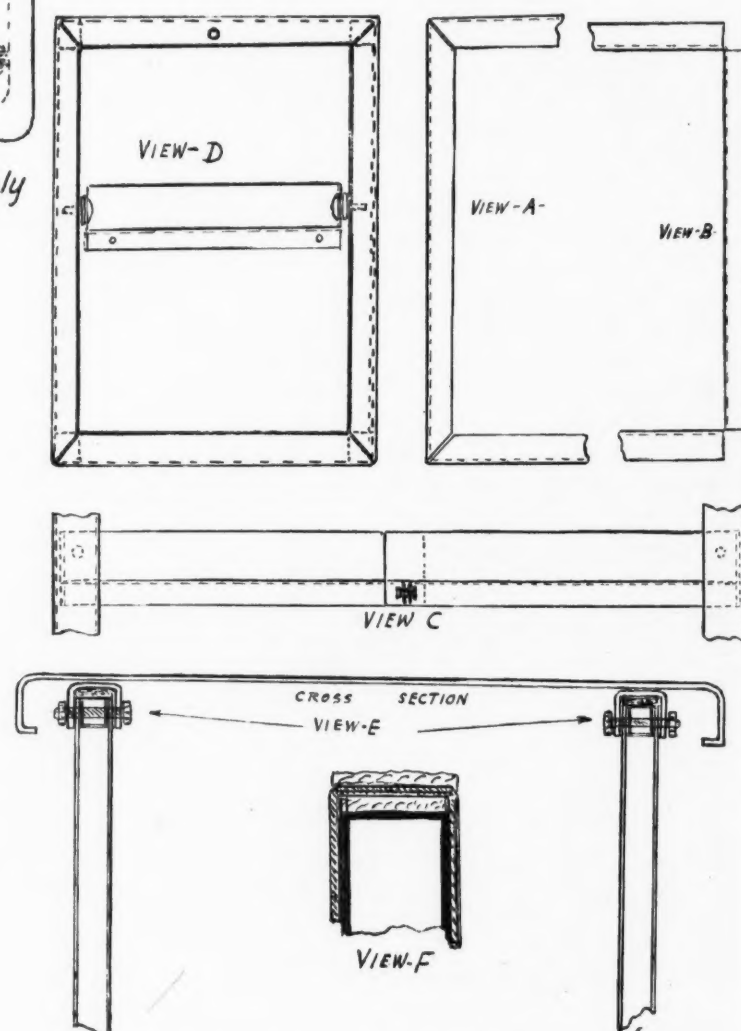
Below—Plan, elevation and details of leg frame Sub-assembly Number 1. Note hinged connection of legs to bench top to permit flat shipment. Text explains construction.
